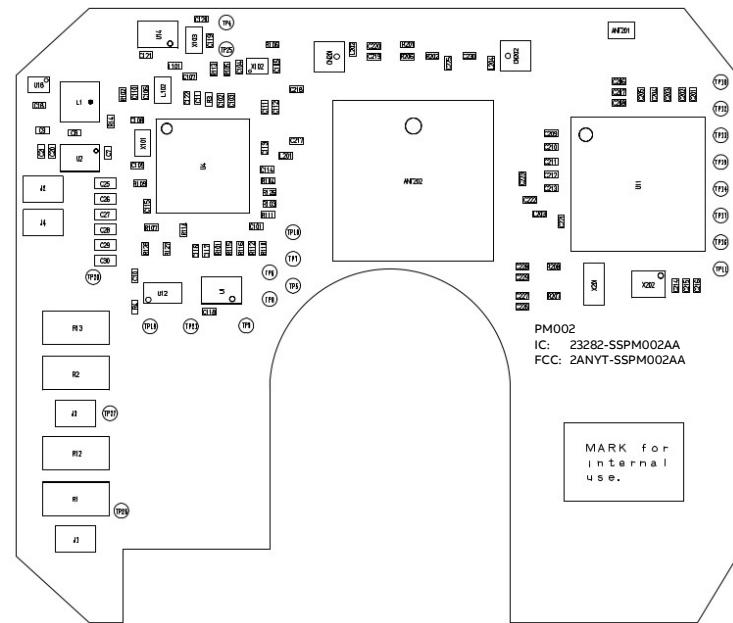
FCC and IC marking of product, laser written into the surface of the PCB
